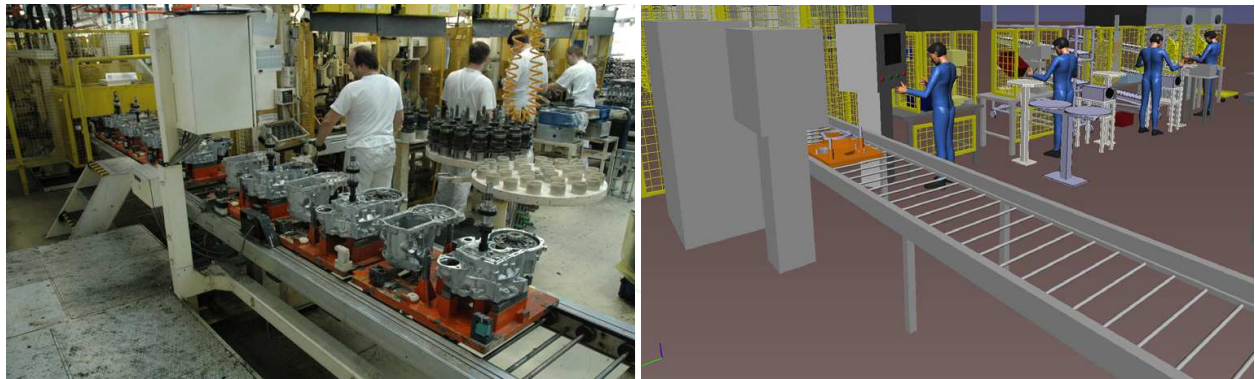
DMUs of Assembly Workplace (Gregor,M.&Medvecký,S.,2010)
